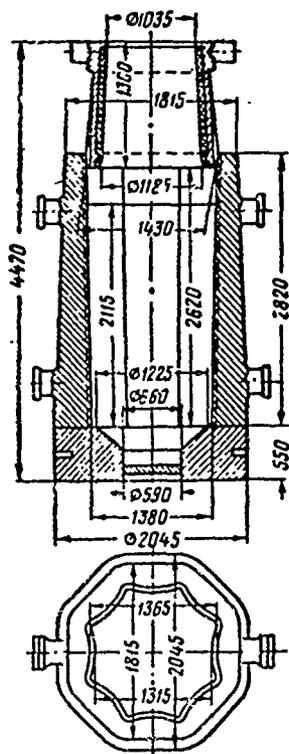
Mold for steel ingot, 32,000-39,000 kg in wt.
